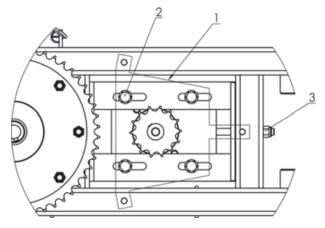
Drive-chain adjustment 1 chain guard, 2 M12 nuts, 3 chain-tensioner bolt
